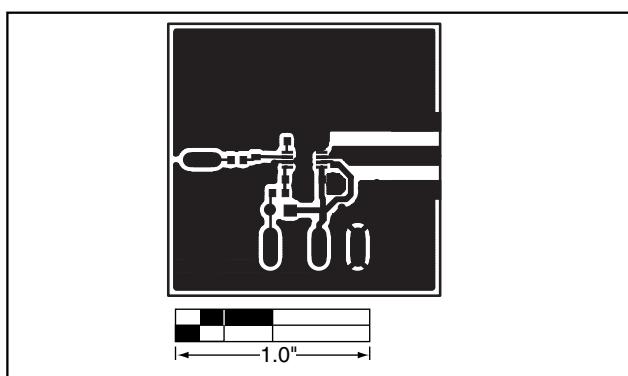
MAX2750/MAX2751/MAX2752 EV Kits PC Board Layout—Component Side
